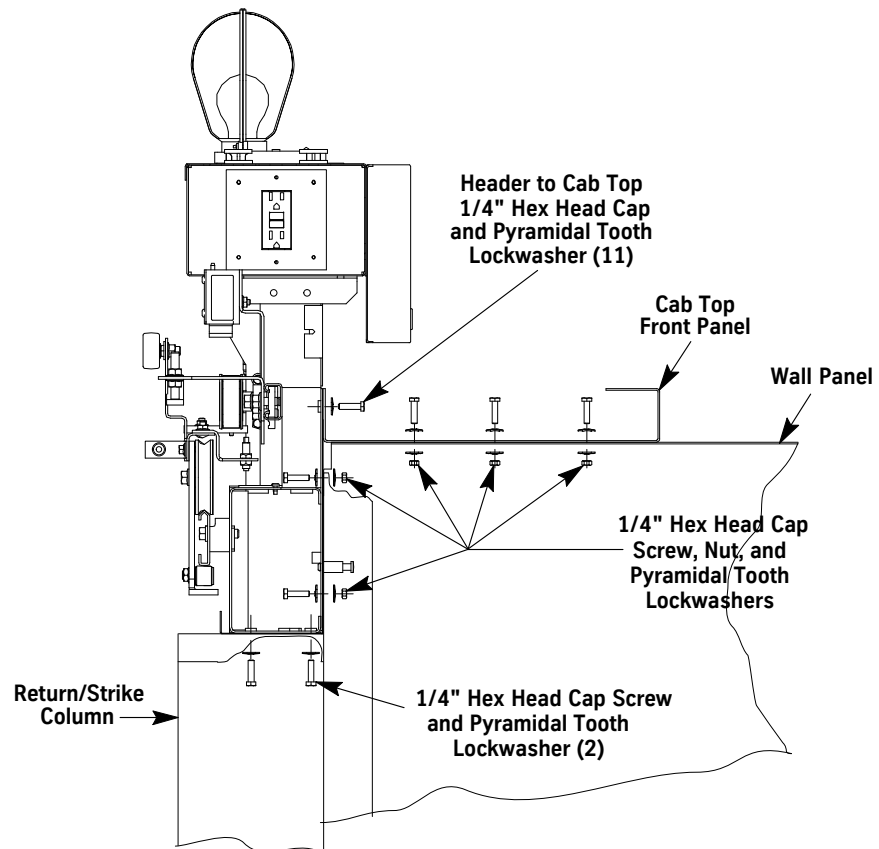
Mount the Door Operator and Header Assembly to the Cab
